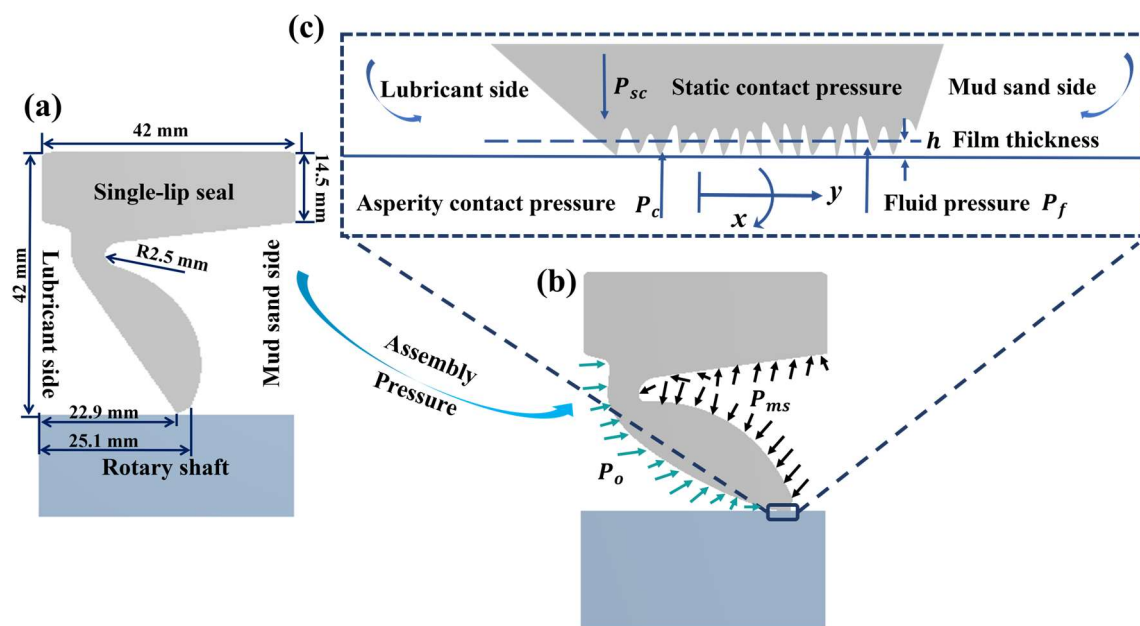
(a) Structural schematic of the rotary lip seal in the main drive of a shield tunneling machine: (b) assembly and pressure application and (c) contact zone sealing.
